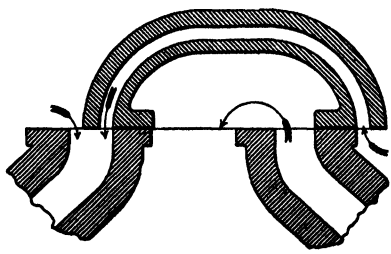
Trick Valve at Extreme Right Position with Steam Port Open Wide
